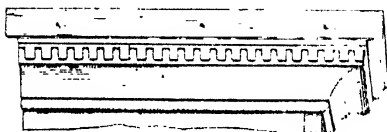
Portion of Side Cornice Moulding with Fresh Piece Fixed in: Unfinished
